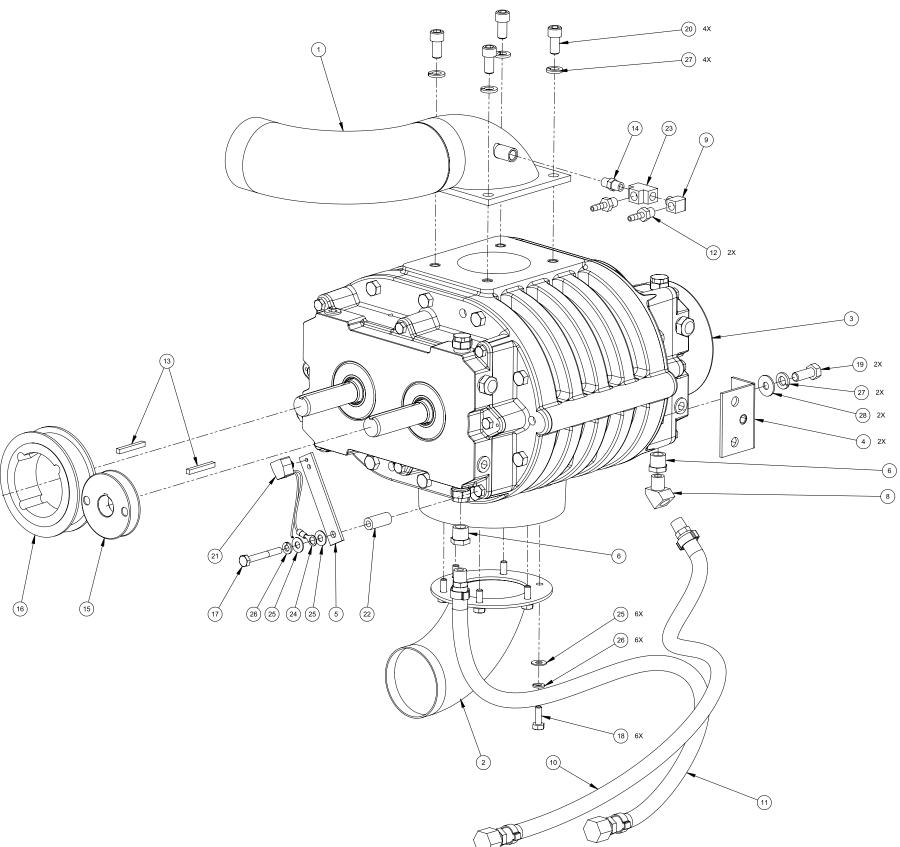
Blower Assembly 601-002-701 Rev. B
